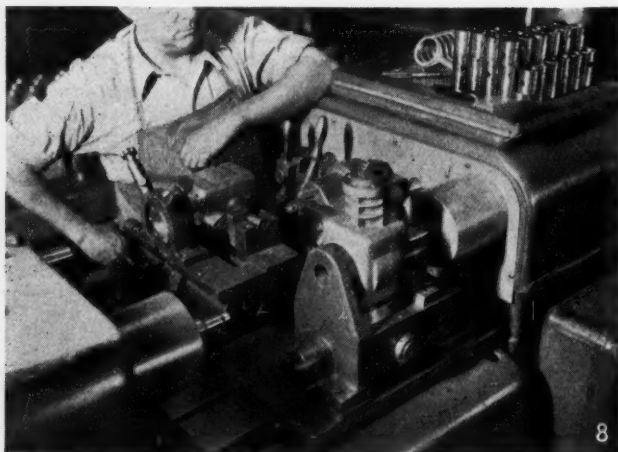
The working fits on all the more important parts in the compressor are bored to size in this "boring" machine, using tools that are tipped with tungsten carbide. Six different operations on five different parts are performed in one setting.
